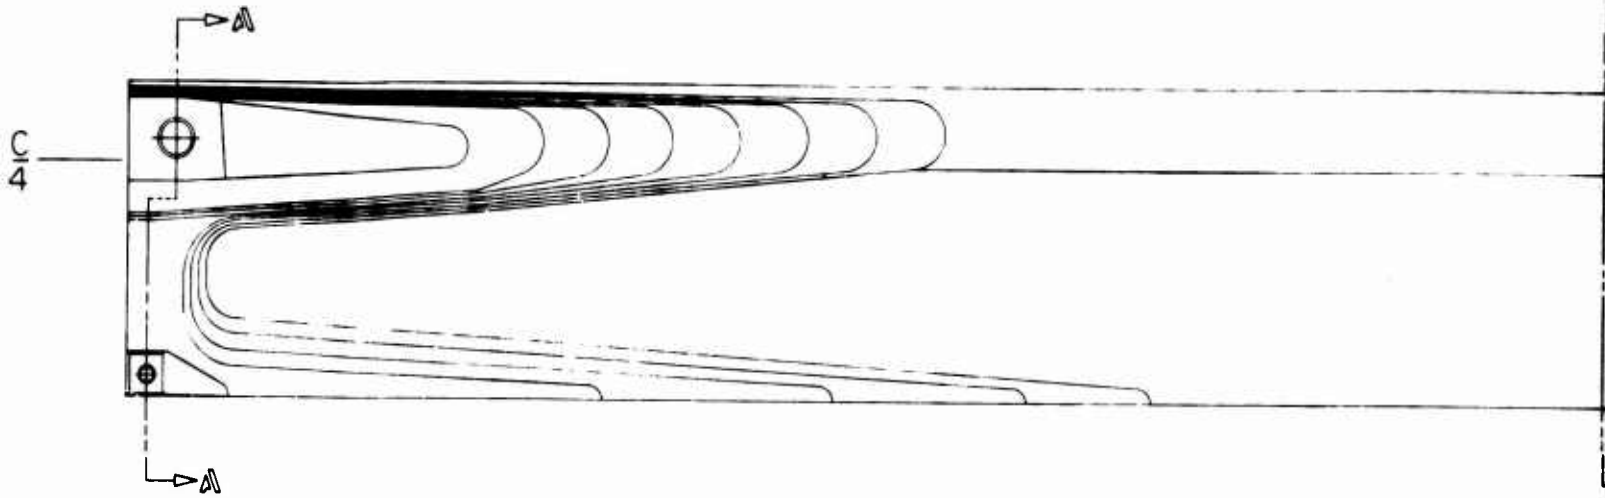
Design 4, Expendable Rotor Blade, Two Basic Extrusions.
